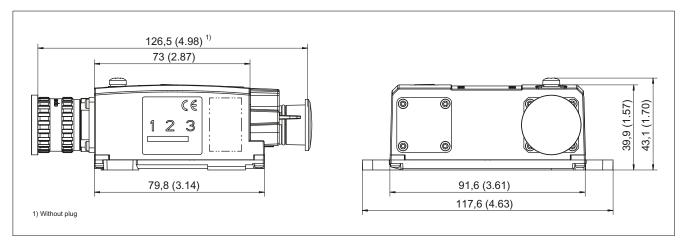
Dimension drawing of Sensor Module External SME125, all data in mm and (inches) order number 6SL3055-0AA00-5KA3
